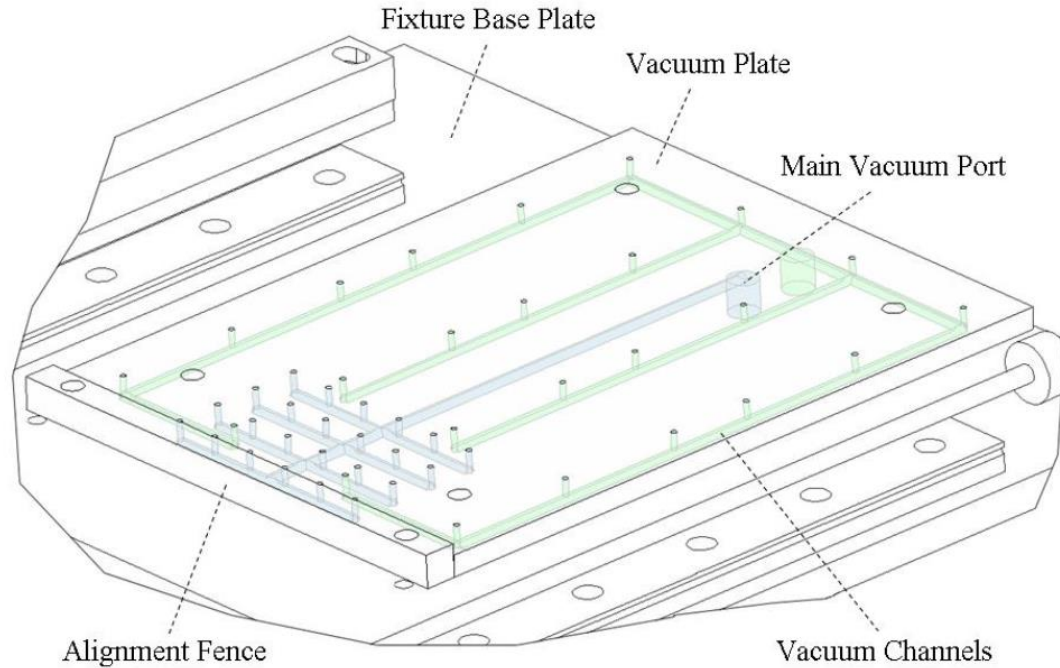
Vacuum fixture for securing the samples during the inspection
